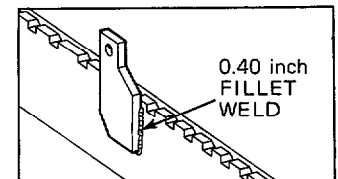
Weld the Bottom and Sides of Anchor Bracket
